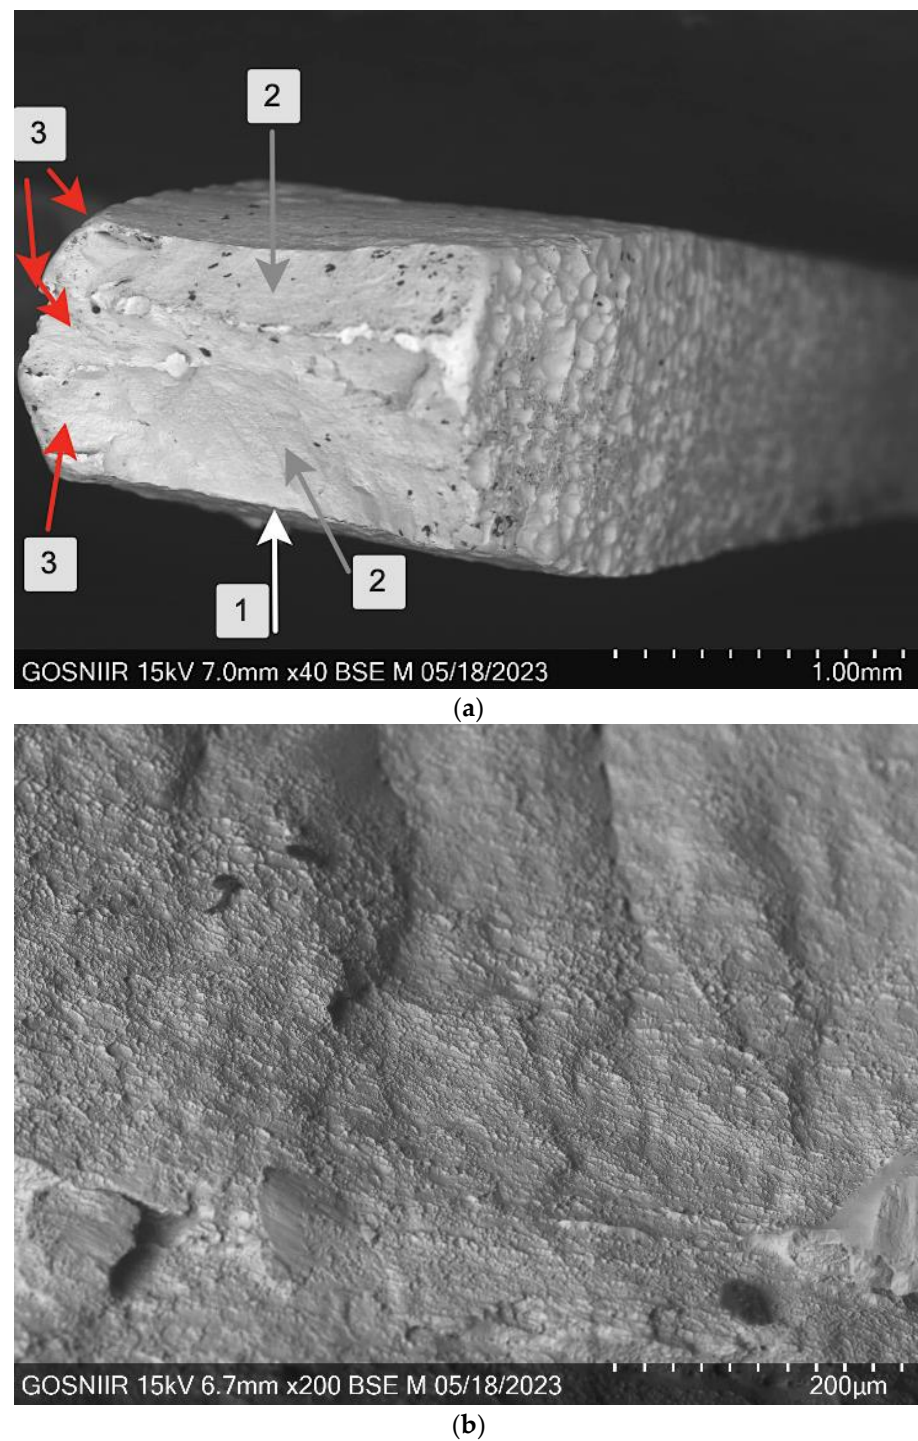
Fractography of Ti-40Zr-9Nb alloy after rolling and quenching: (a) general view of static fracture; (b) view of fracture surface.
